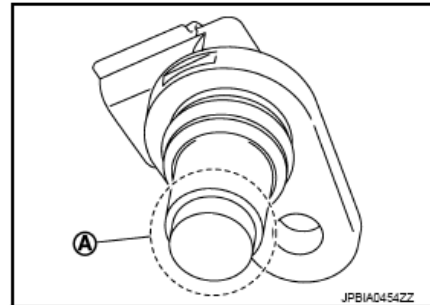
Identifying Camshaft Position Sensor Magnetic Portion
